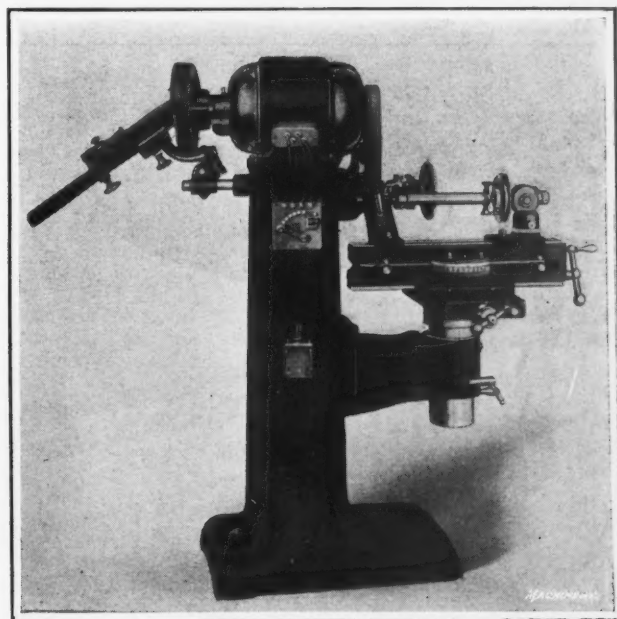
Wilmarth & Morman No. 0 Universal Cutter, Reamer, and Drill Grinding Machine equipped with Individual Electric Motor Drive
